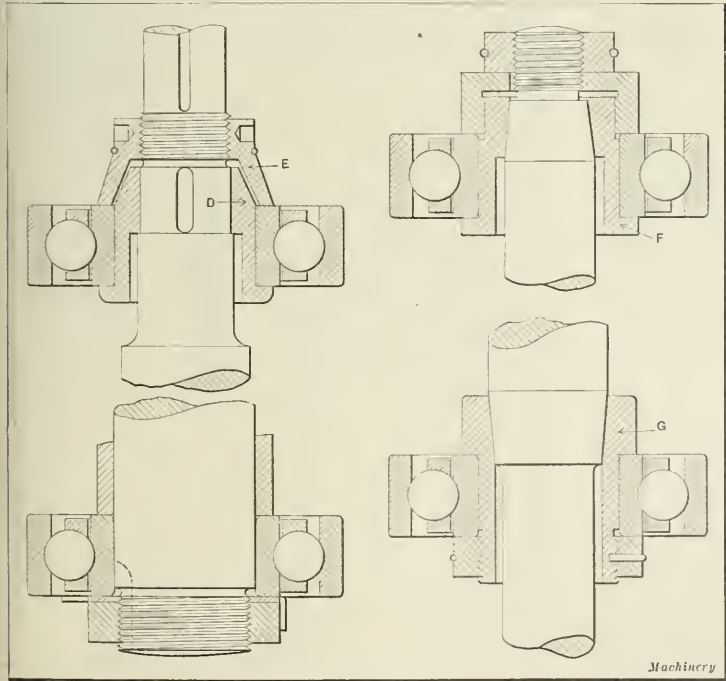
Satisfactory Method of mounting Bearings on Vertical Shaft
